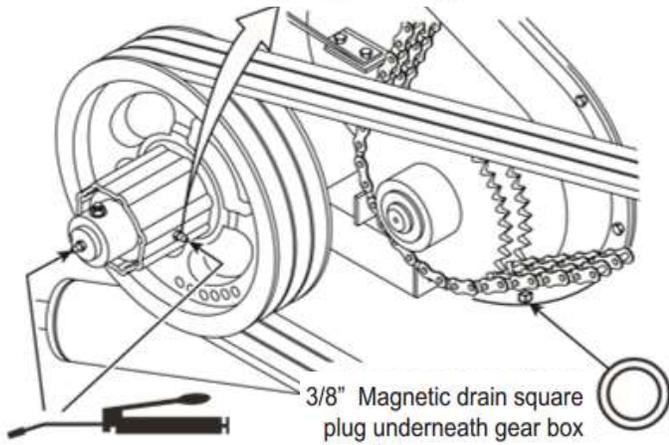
Main gearbox, spout rotation and hydraulic trailer disconnect
